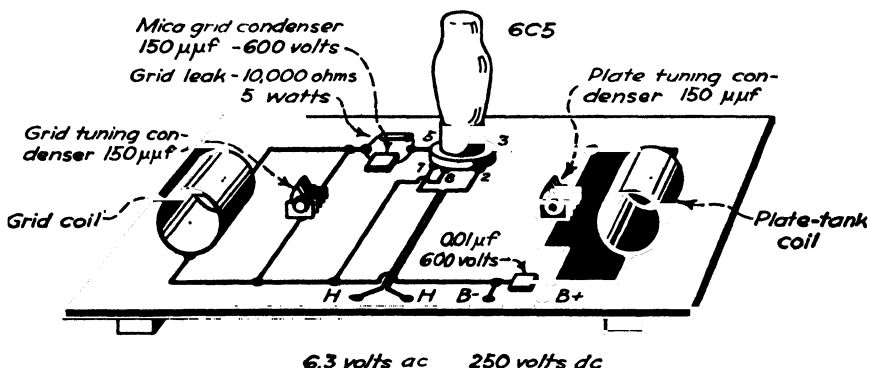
The layout of parts for the tuned-plate tuned-grid oscillator.
